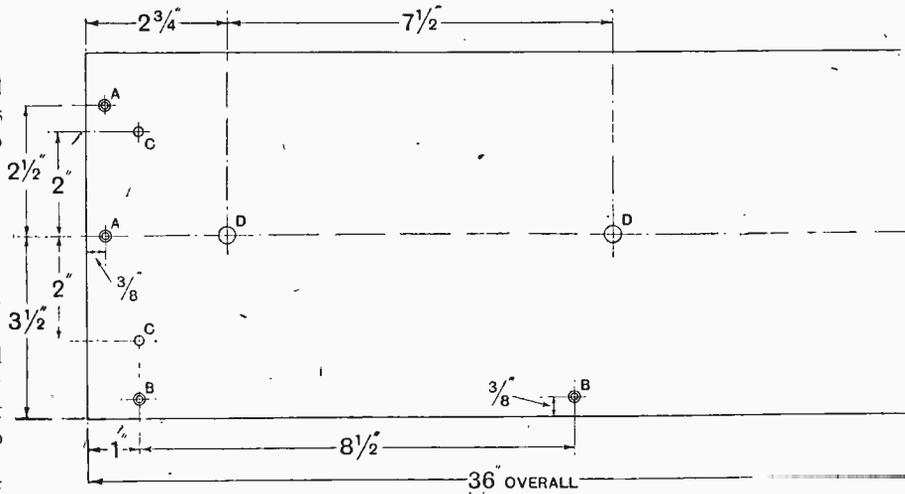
Details of the front panel. A, 1/8in. dia., countersunk for No. 6 B.A. fixing dia.; E, 3/8in. dia.;
